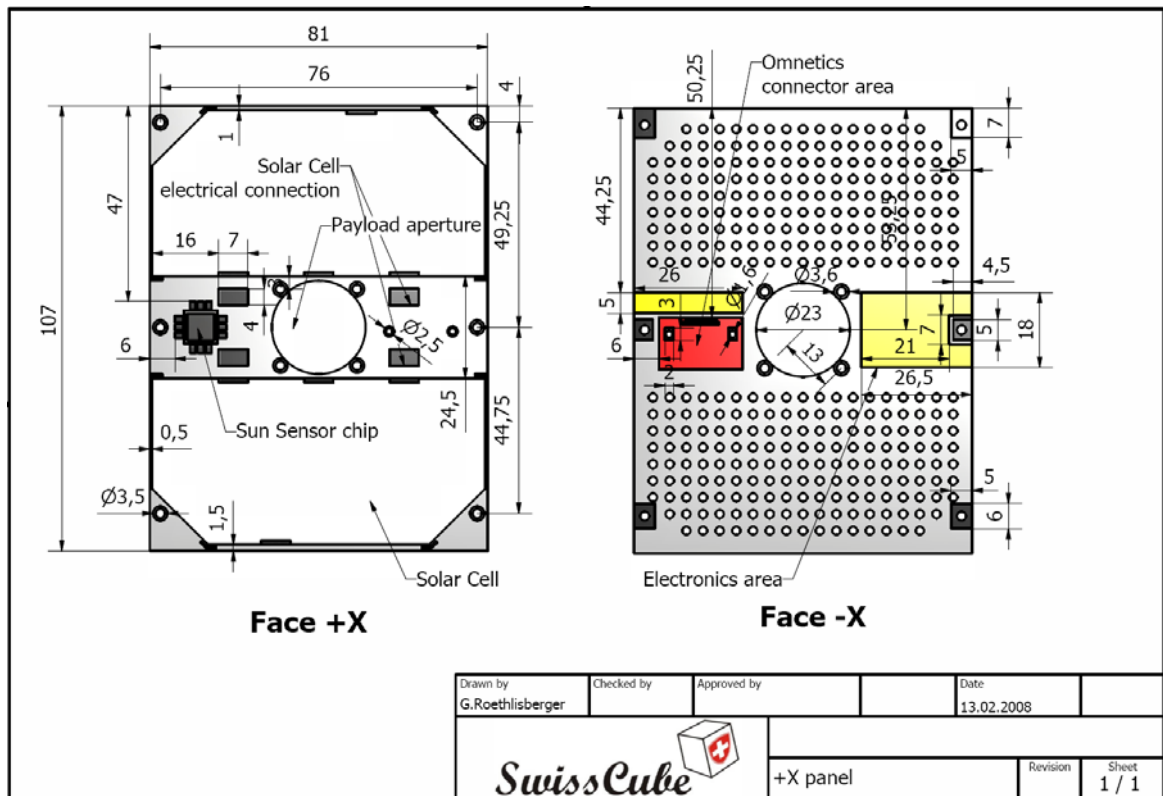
Payload Panel (+X) dimensions, fixation and layout.
